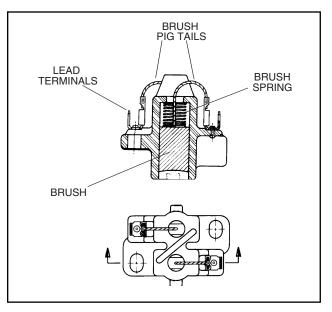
BRUSH BLOCK ASSEMBLY
